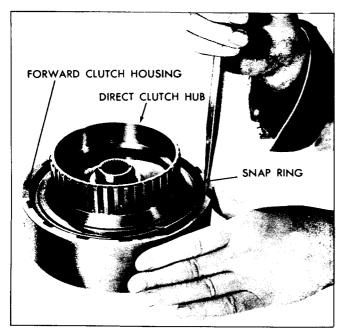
E-114 Removing or Installing Clutch Hub Retaining Snap Ring'
